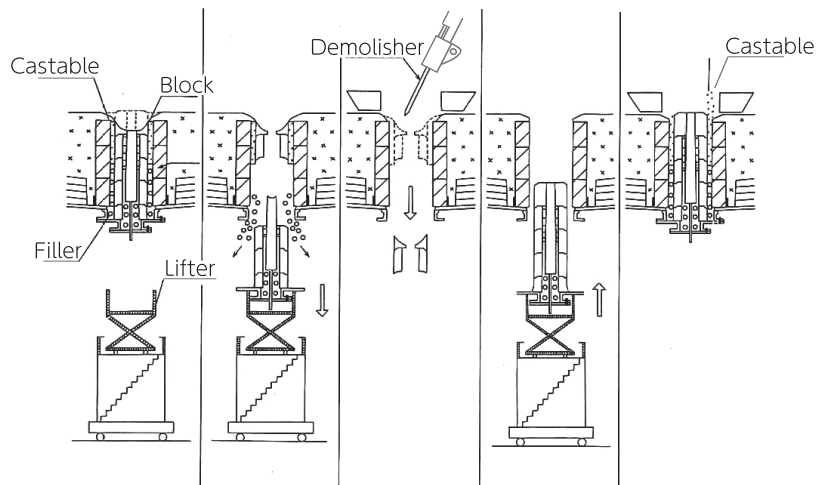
An example of outward replacement of gas blowing tuyere assembly¹⁵.
